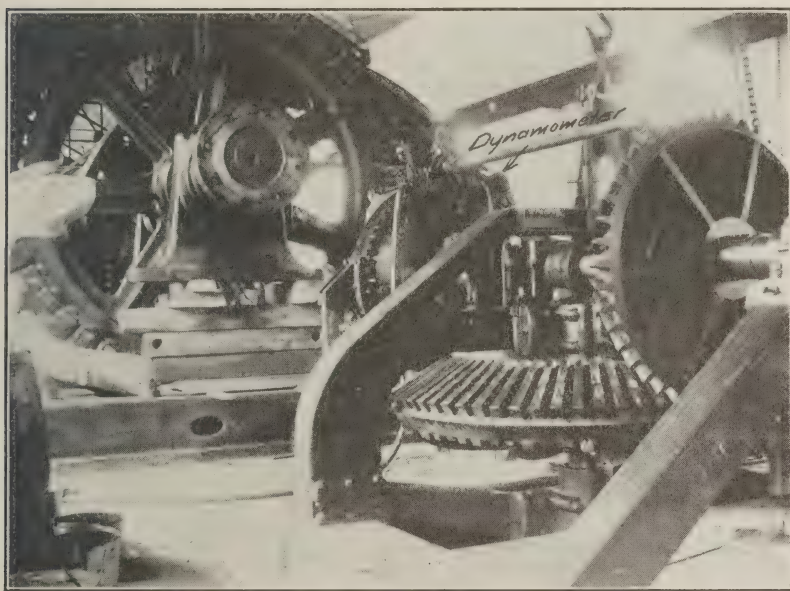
HORIZONTAL TESTING OF VERTICAL WHEELS WITH BEVEL GEARS
